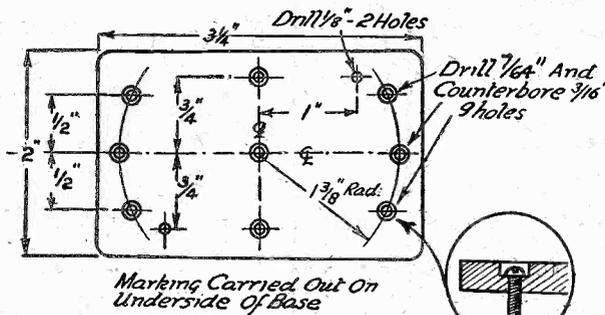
The above drawings give the necessary dimensions for making and drilling the ebonite base-plate
